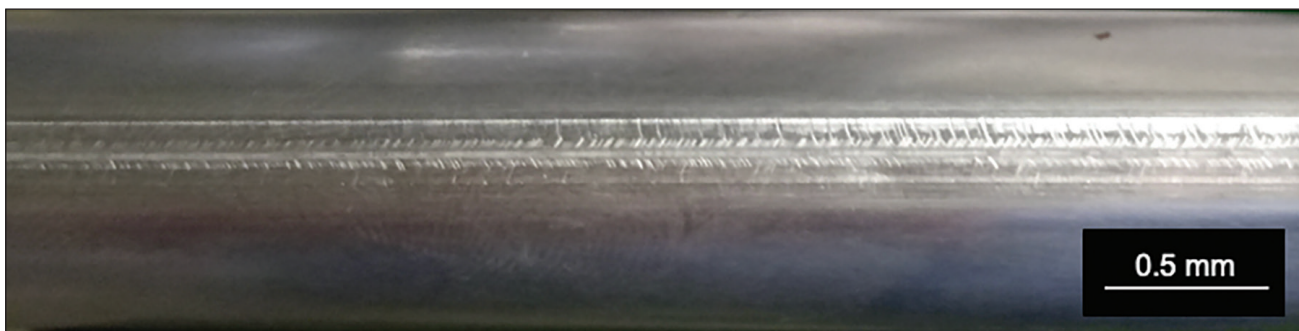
Weld joint of a HF induction-welded aluminum tube (top view).
